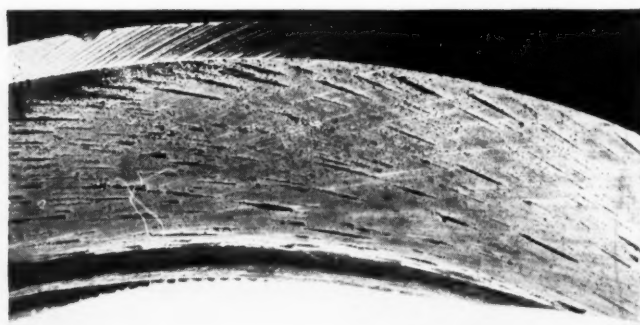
Satisfactory pinion gear tooth surface. Dark, irregular lines are original tool marks. High Torque-Low Speed Axle Test.
